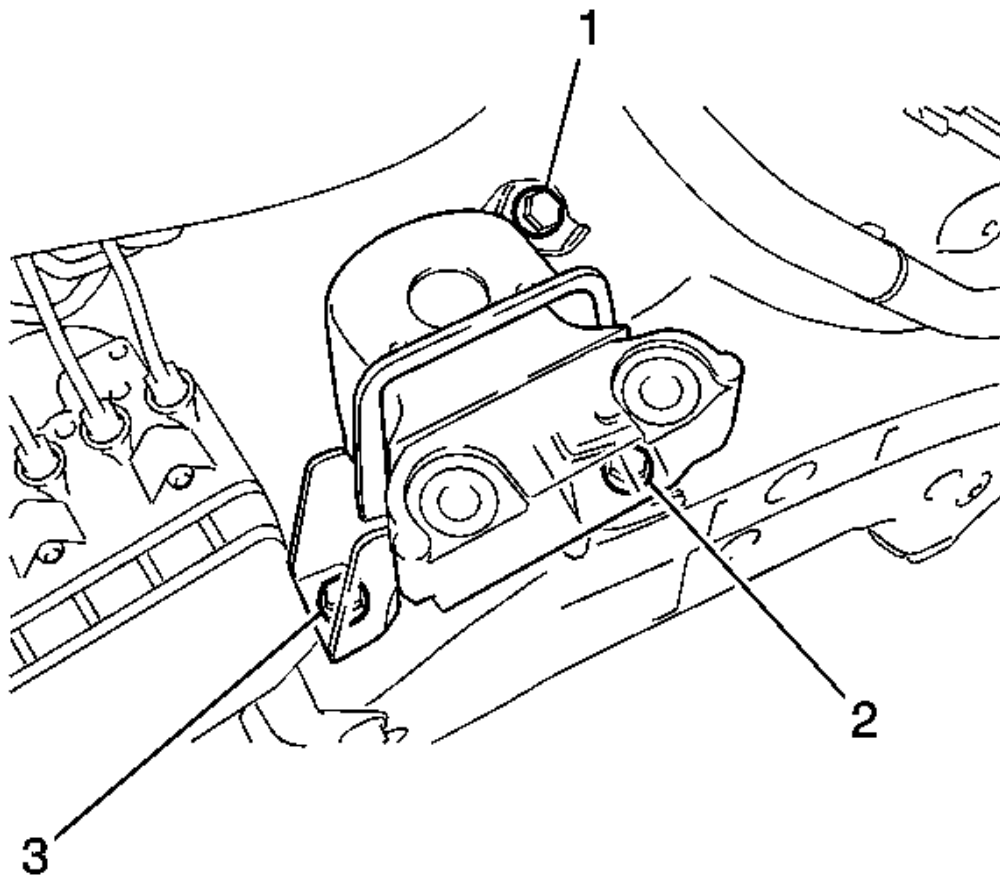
Identifying Right Engine Mounting Insulator Sub-Assembly & Bolts
